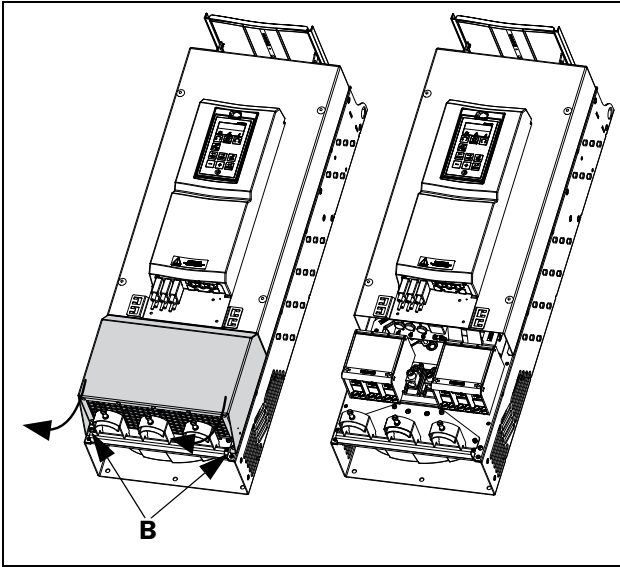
Loosen the two screws and remove the lower cover (principle drawing)
